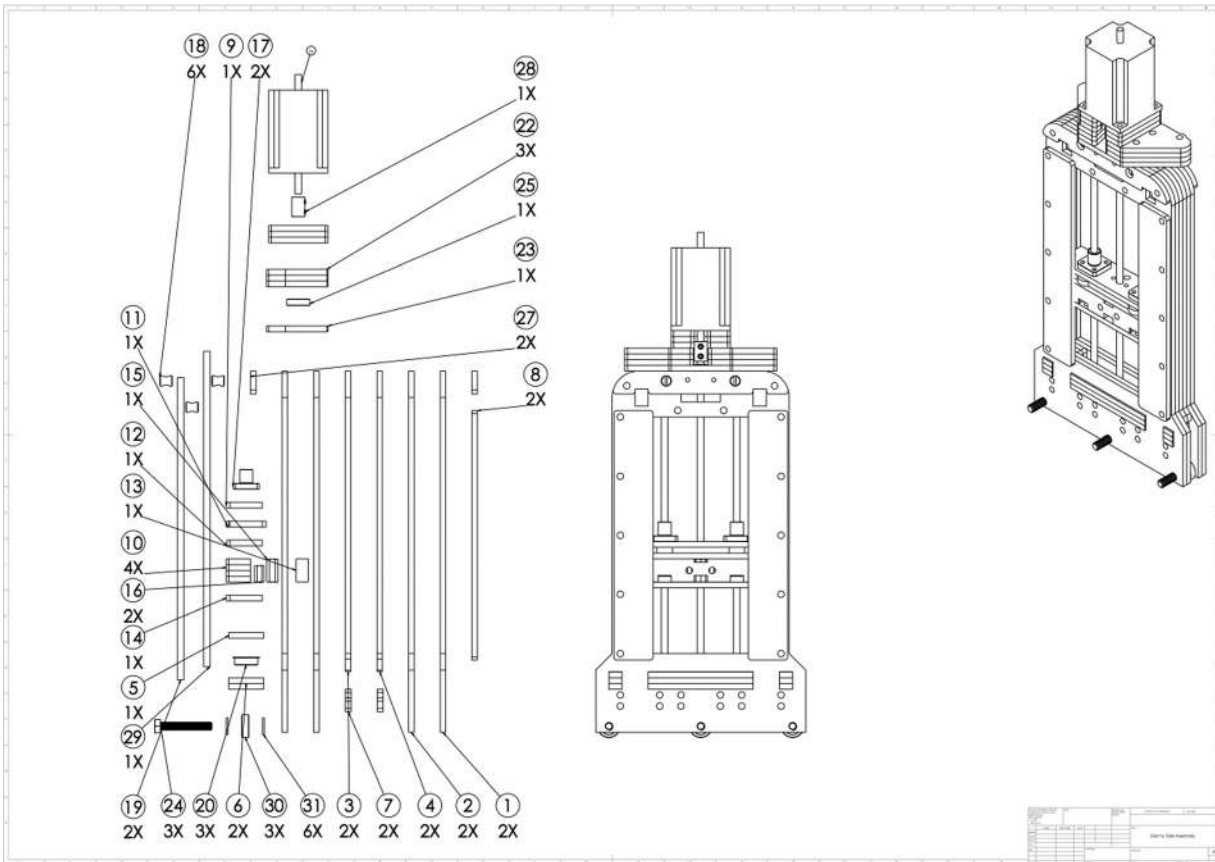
V2 rocket assembly: For ease of viewing, the assembly depicts half of the gantry structure that actuates the shuttle along the 120 mm Z-axis working envelope via threaded rod coupled with a stepper motor. Two linear bearings and shaft-quality precision ground rods ensure vertical motion fidelity.
